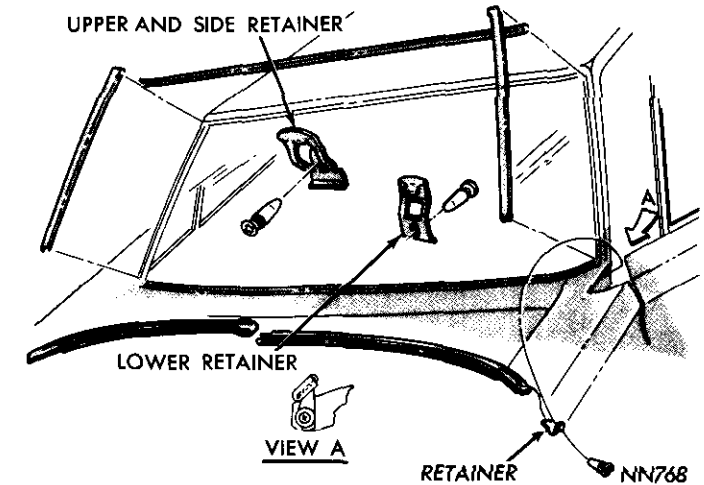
Windshield Outer Mouldings—Coronet-Charger
